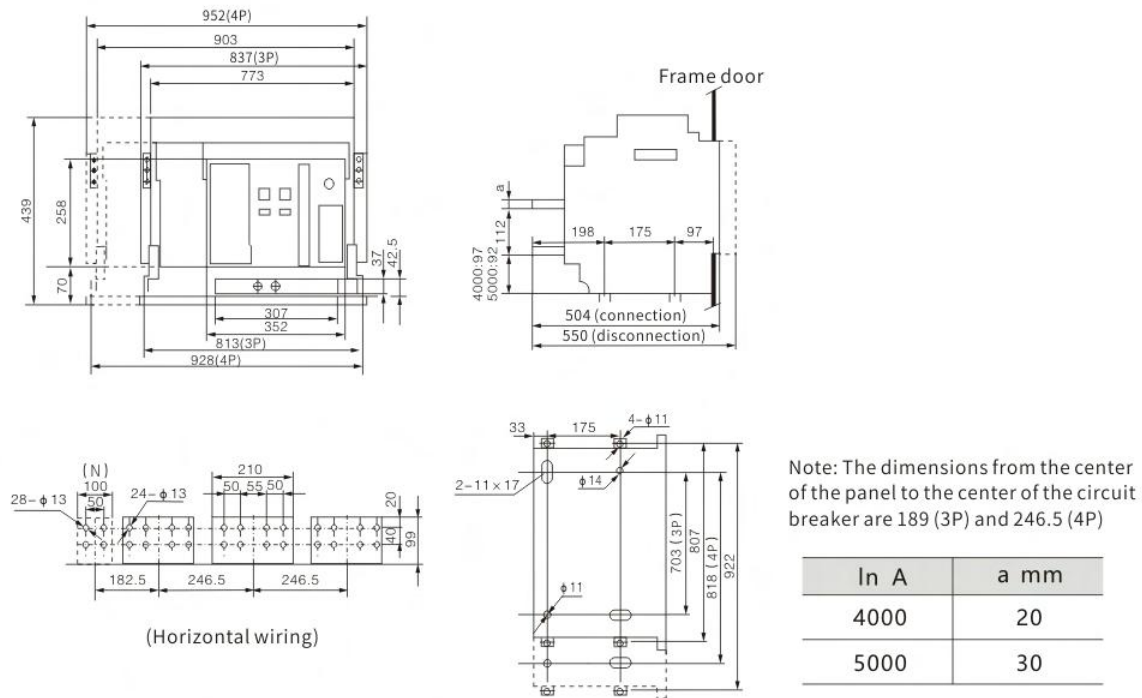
Outline and installation dimension of the draw-out type circuit breaker (JUW1 -6300/3, 6300/4 In=4000A, 5000A)
